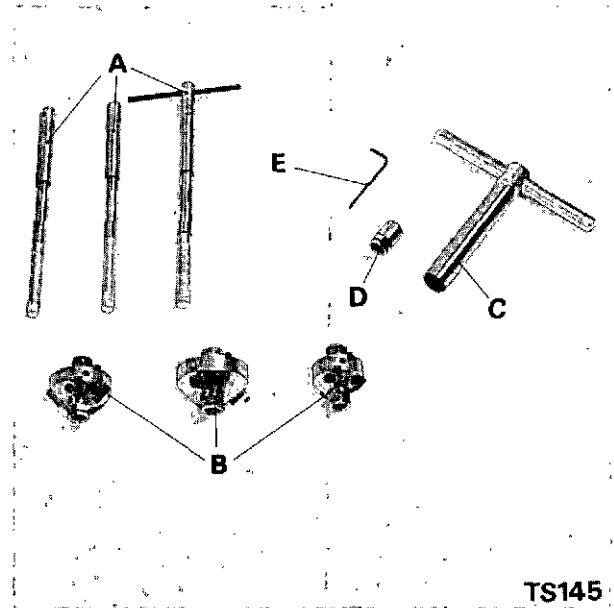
Valve Seat and Recess Cutting Tool – Exploded
